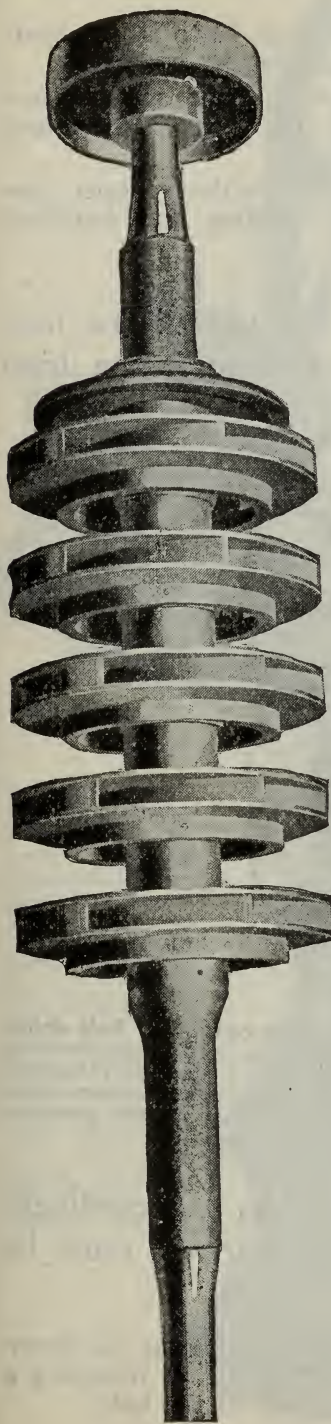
Rotating element or impellers of Allis-Chalmers five stage centrifugal pump showing runners and balancing disc.
